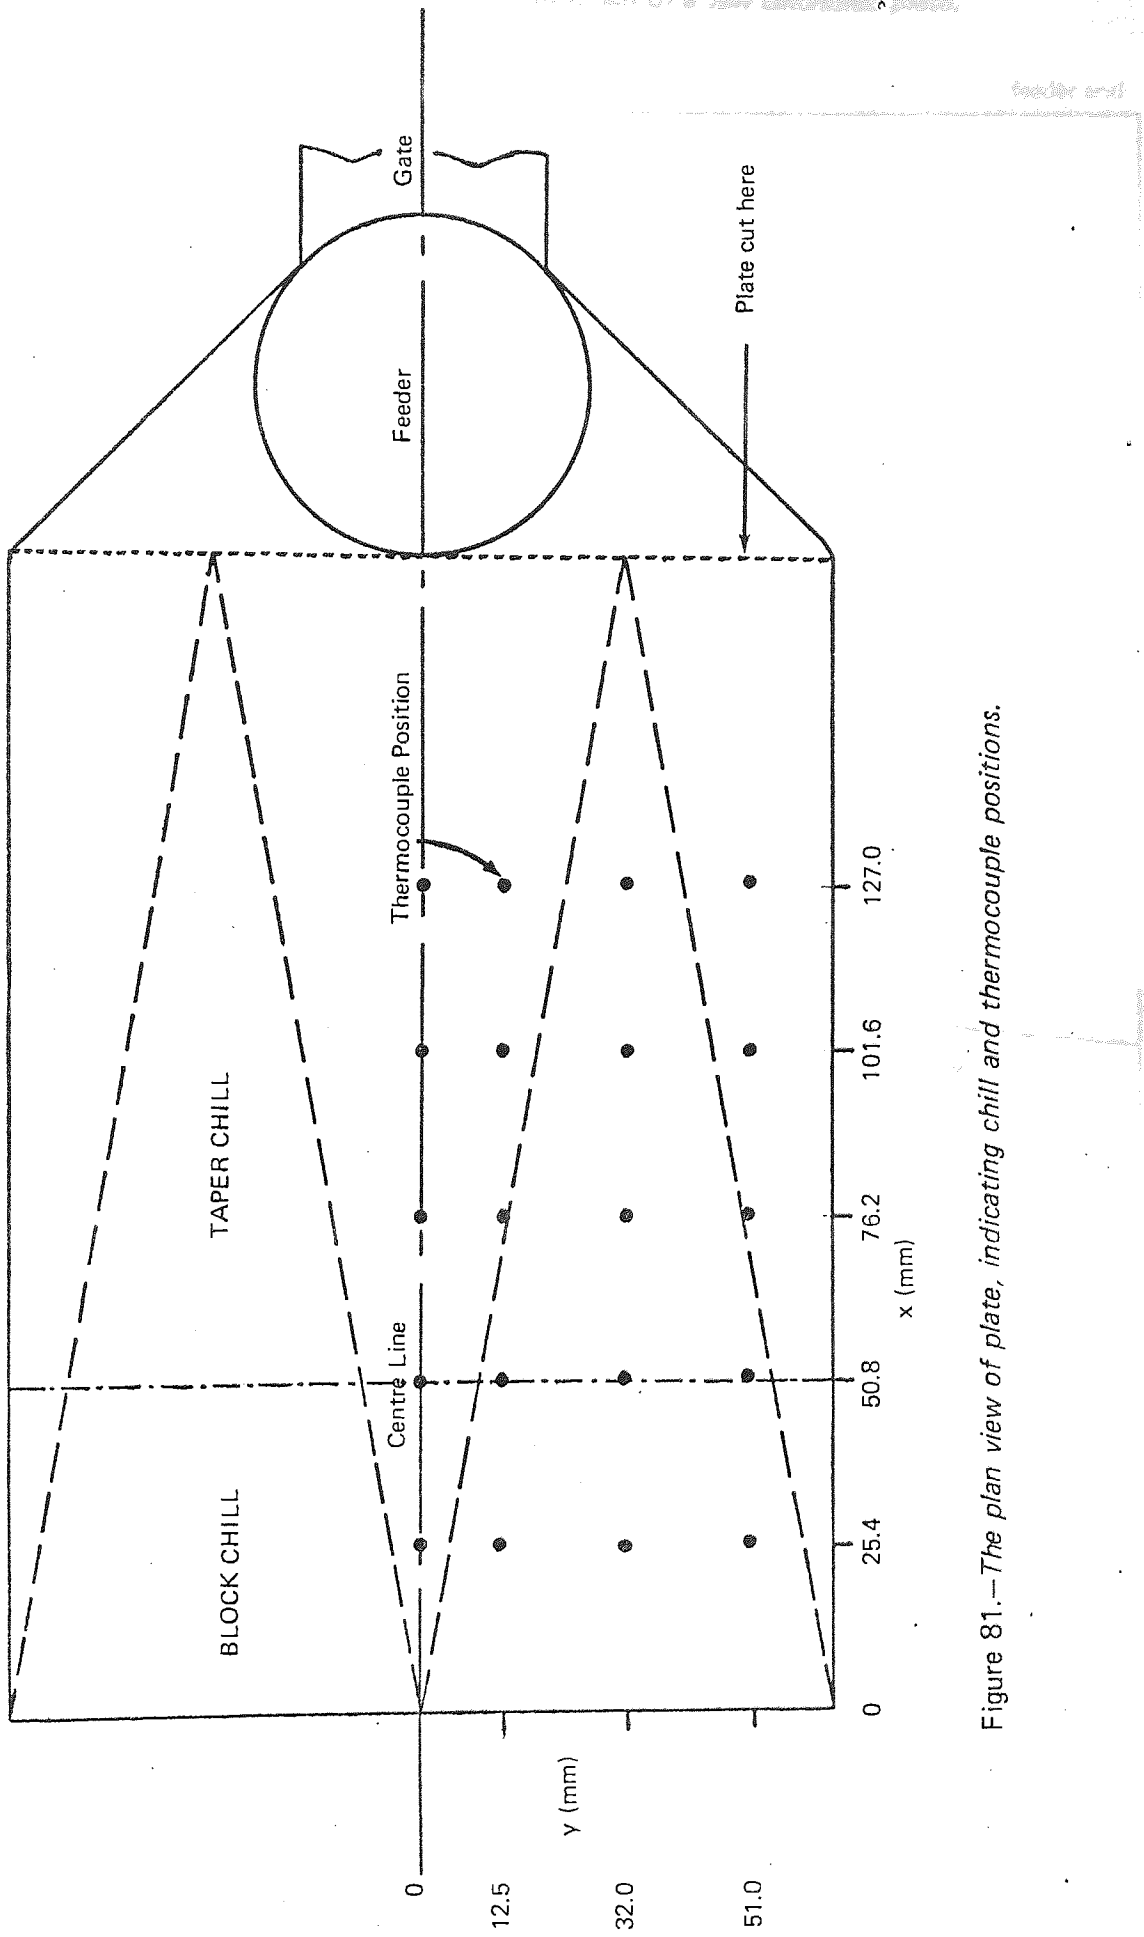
The plan view of plate, indicating chill and thermocouple positions.
